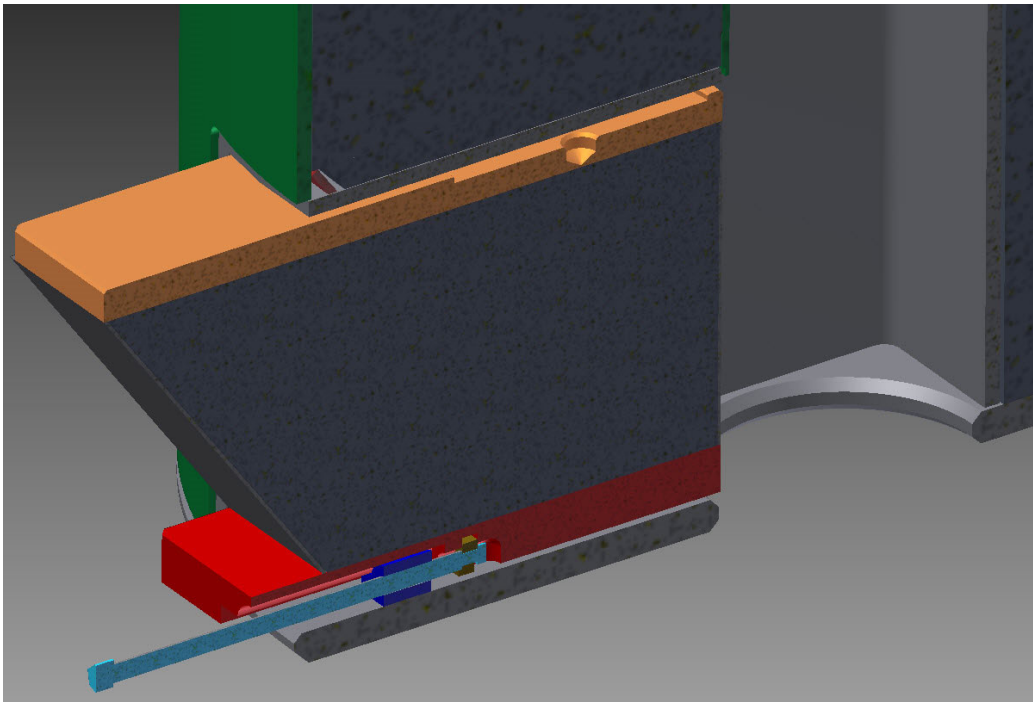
Section view of the target Cask bottom gate, shown in opened position.
